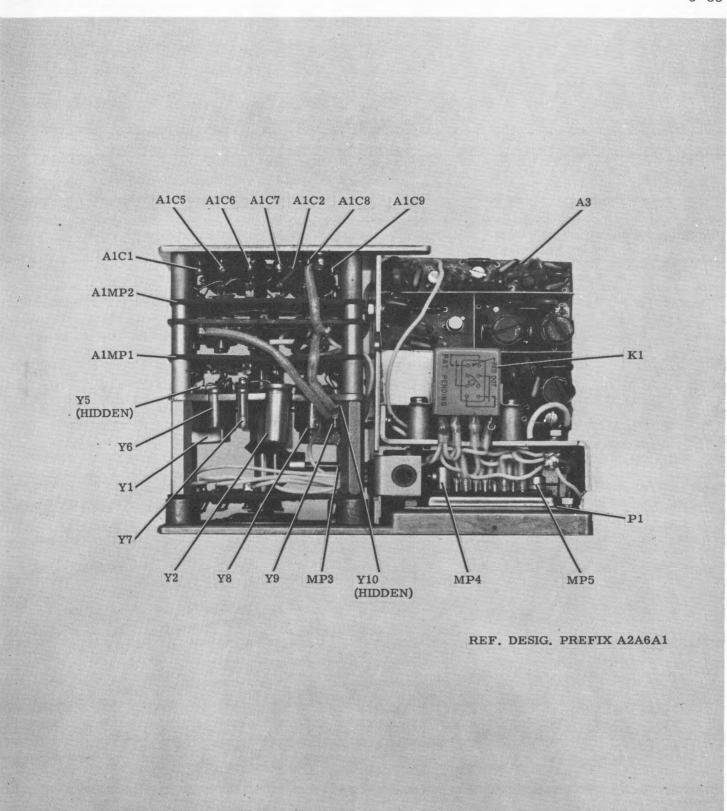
MC Synthesizer Electronic Subassembly, Rear View, Component Location
